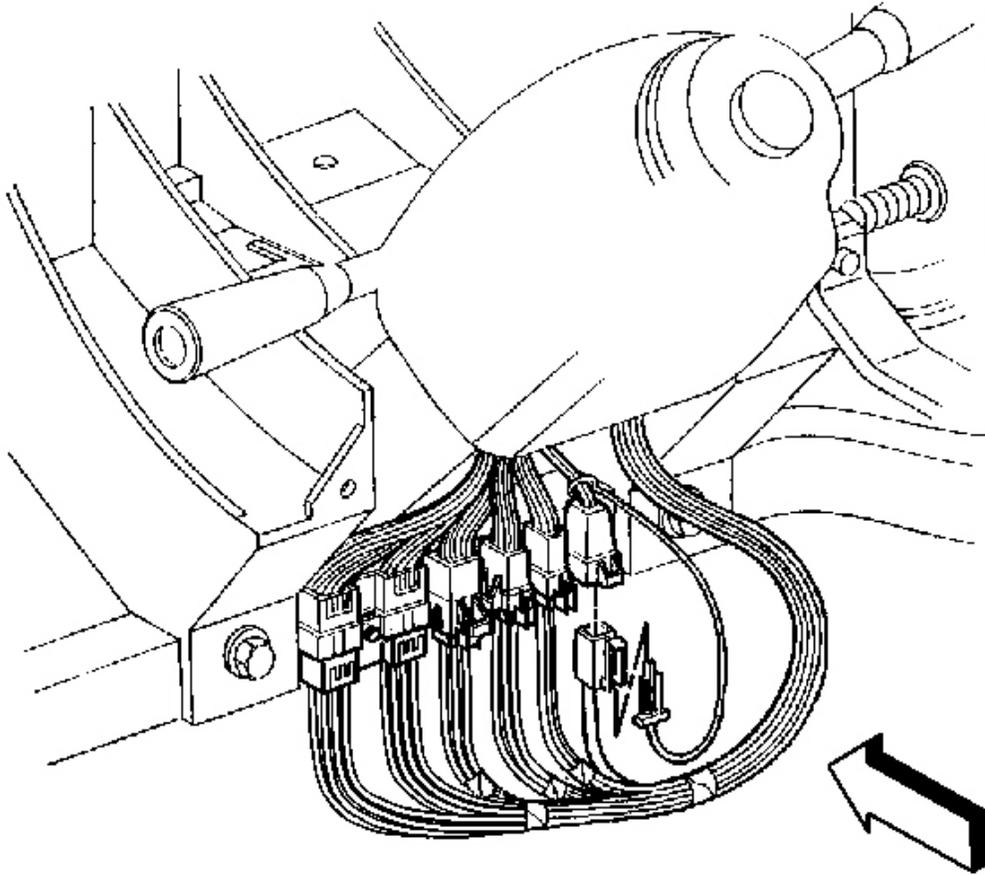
Identifying Steering Wheel Module Twisted Connection
